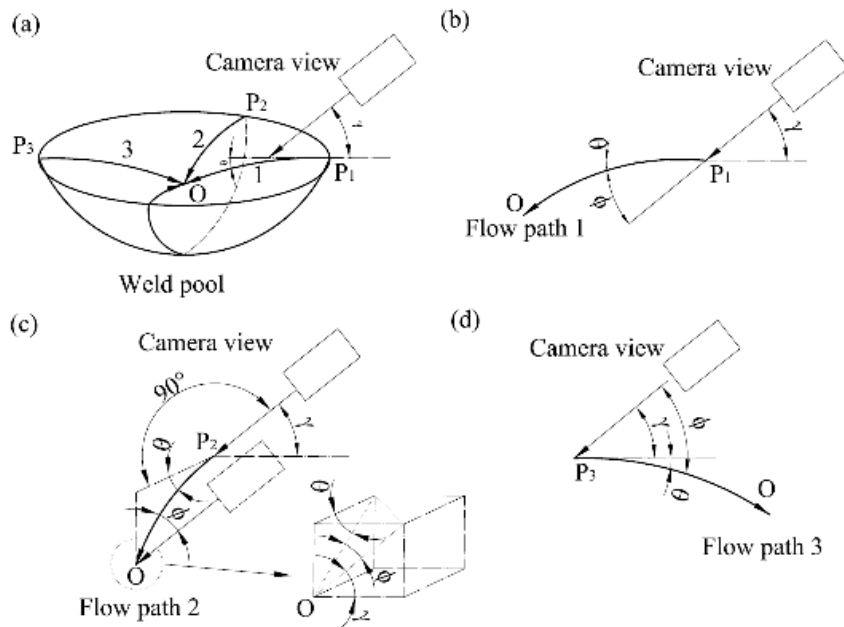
Induced angle between camera and inclination of weld pool surface
